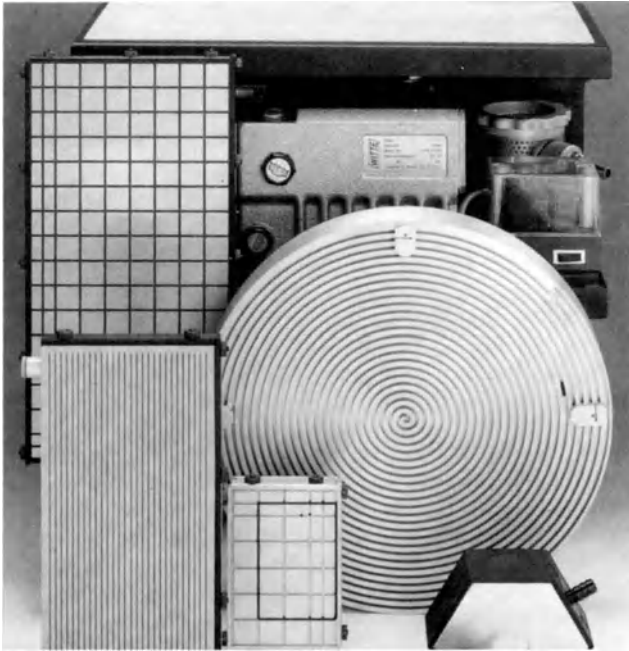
A range of vacuum chucks, fixtures and clamps for turning and machining centres. [Courtesy of Thame Engineering.]
